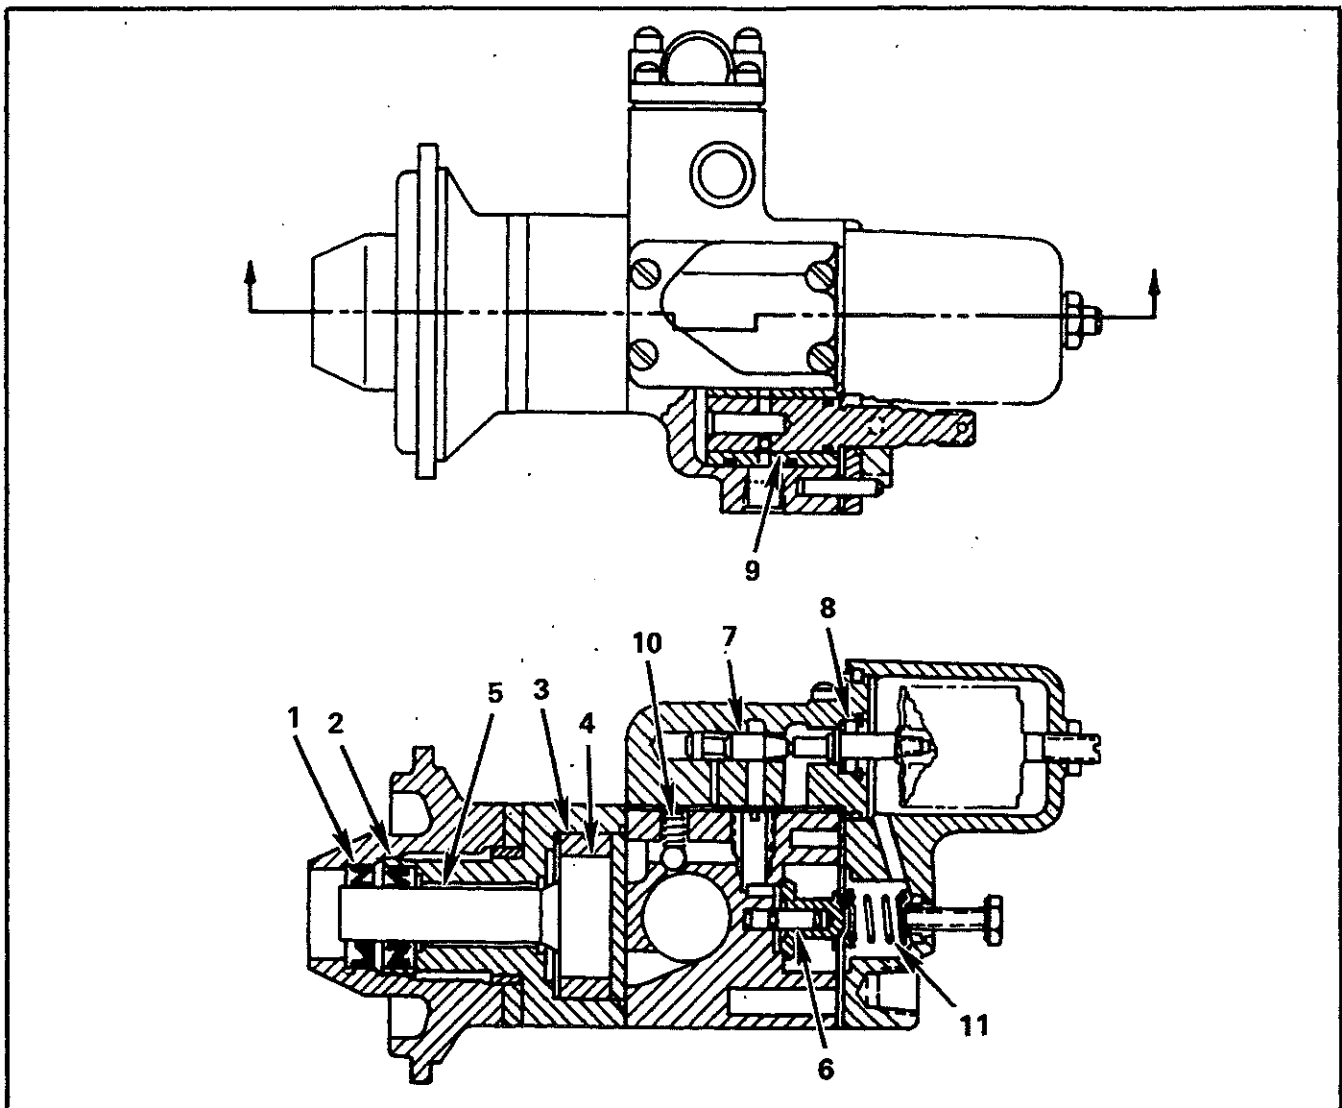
SERVICE LIMITS FOR FUEL PUMP ASSEMBLY.
